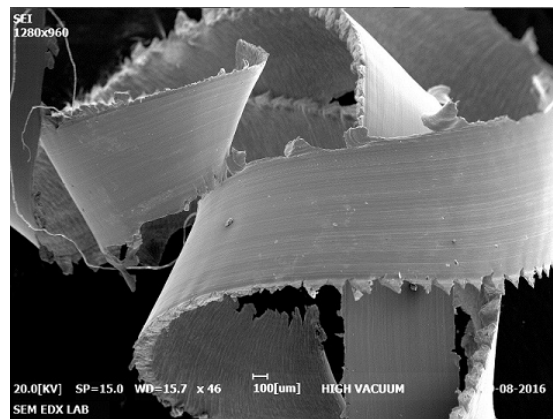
SEM Images of dry machining with cutting length of 90 mm and machining duration 5 min (cutting speed-70.37 m/min and feed-0.150 mm/tooth)
